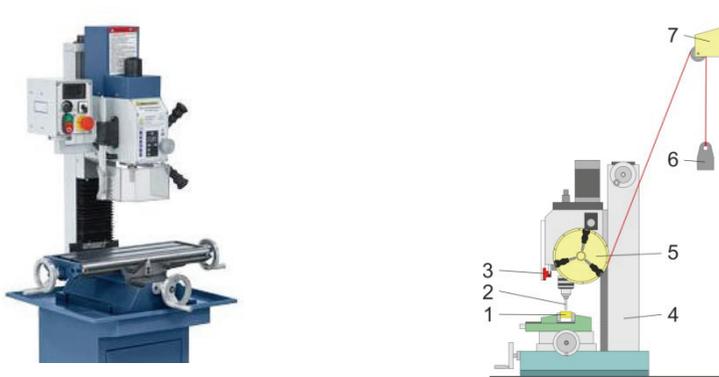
Special test stand using a constant pressing force on the tool (1 - sample material, 2 - tool, 3 - sensor, 4 - body of drilling machine, 5 - drive wheel, 6 - weight, 7 - block of housing fixed to the wall)
